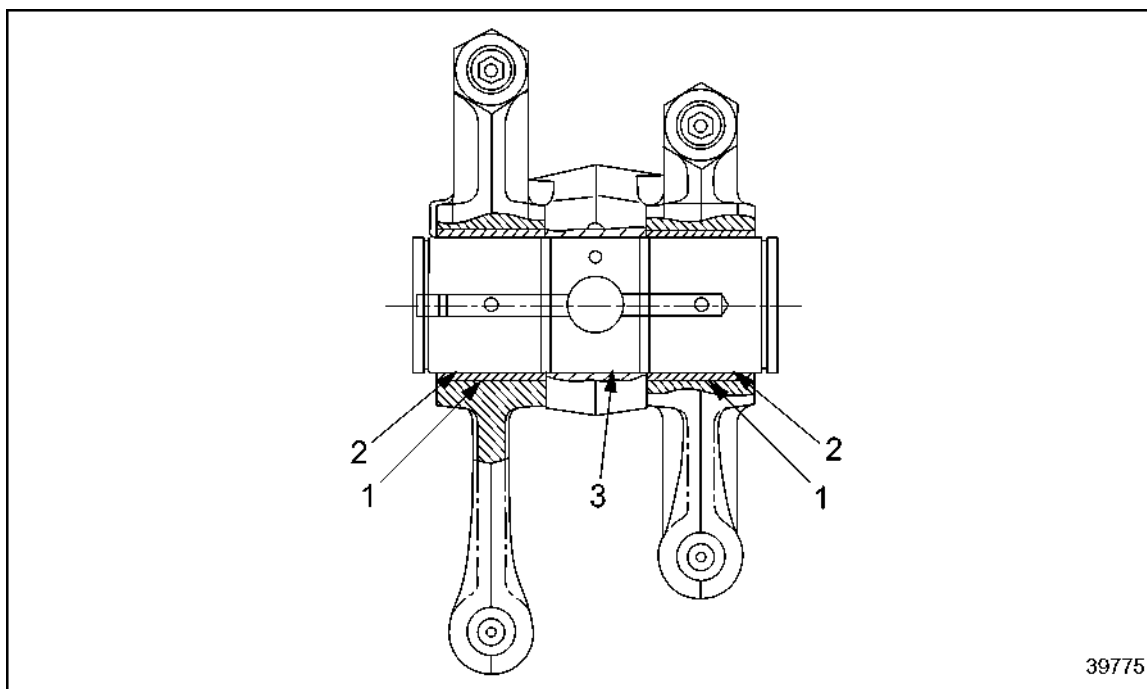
Inlet and Exhaust Rocker Arm Bearing
